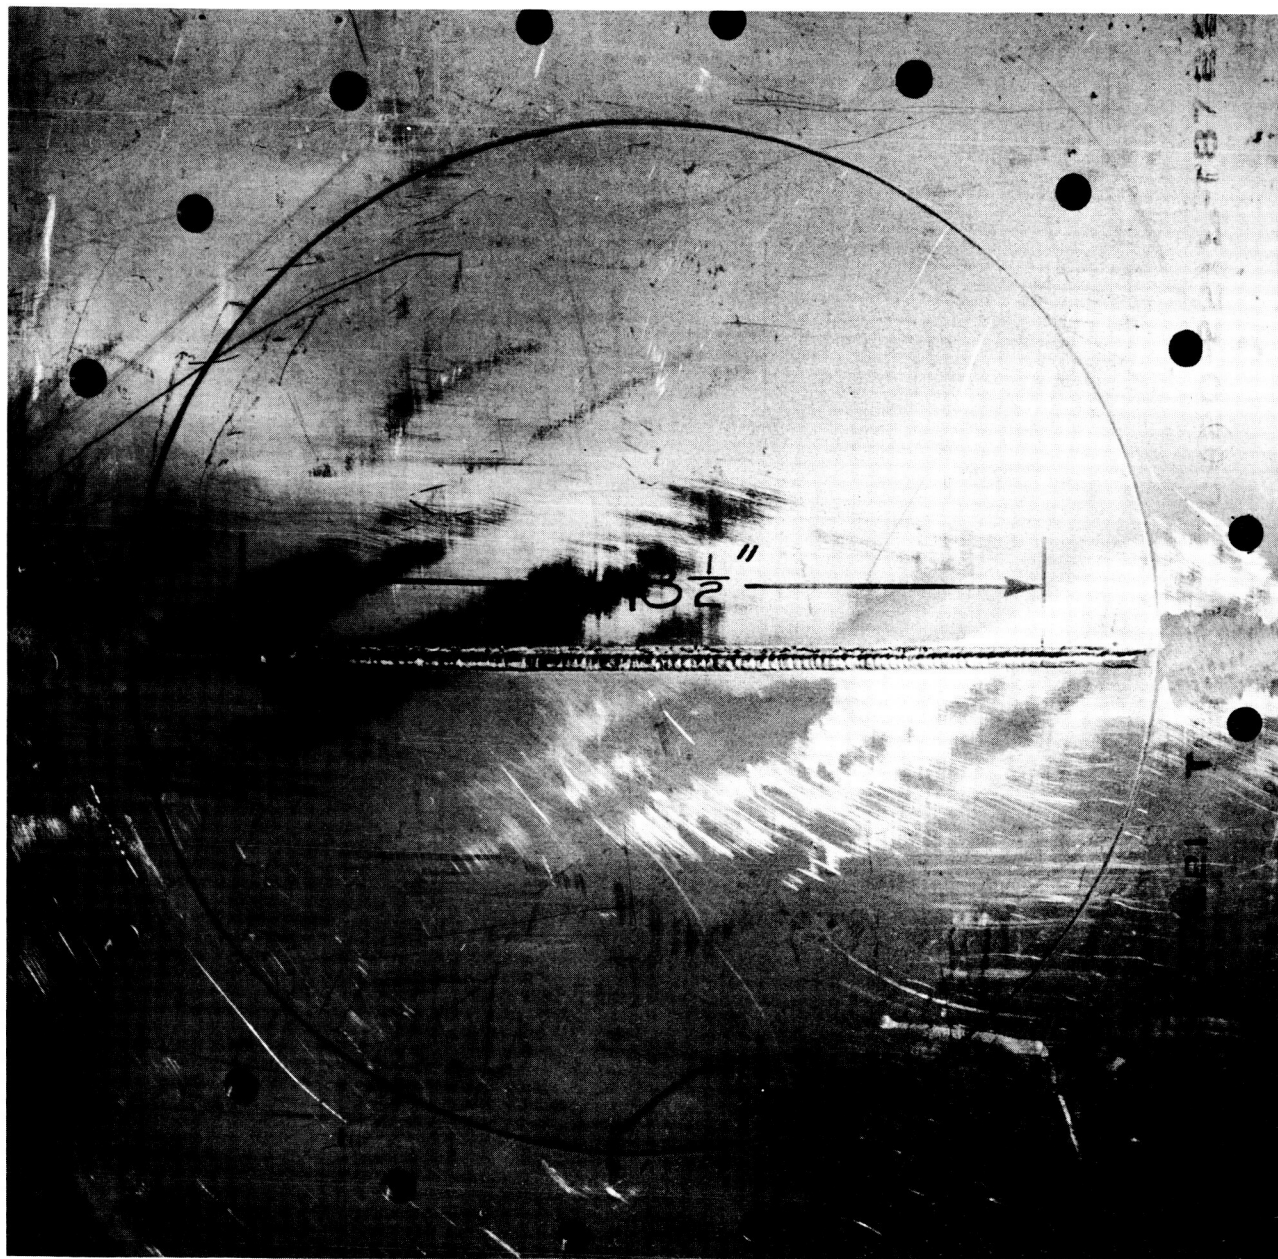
SURFACE CRACK IN PANEL C AFTER BULGE TEST
